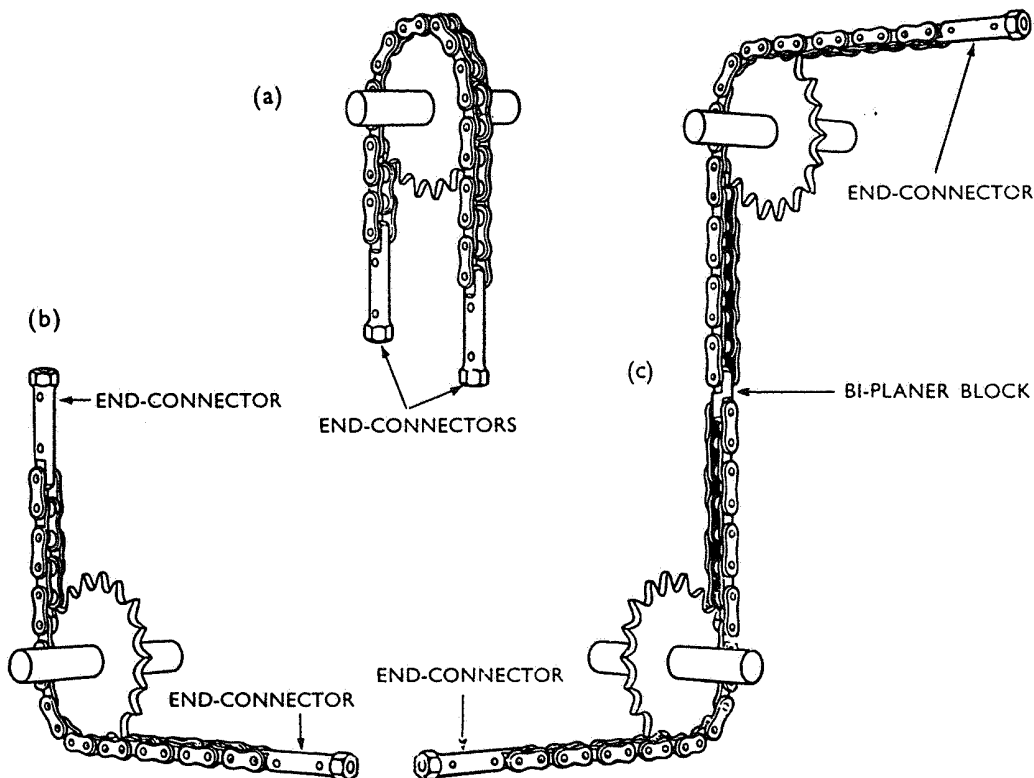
TYPICAL CHAIN ASSEMBLY ARRANGEMENTS
